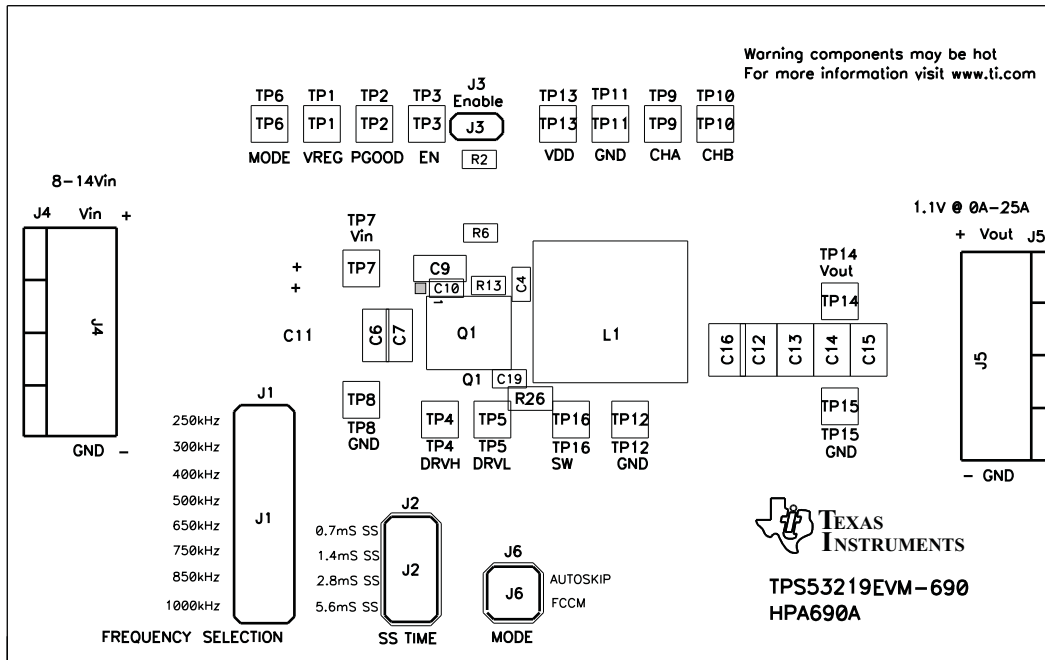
TPS53219EVM-690 Top Layer Assembly Drawing, Top View
